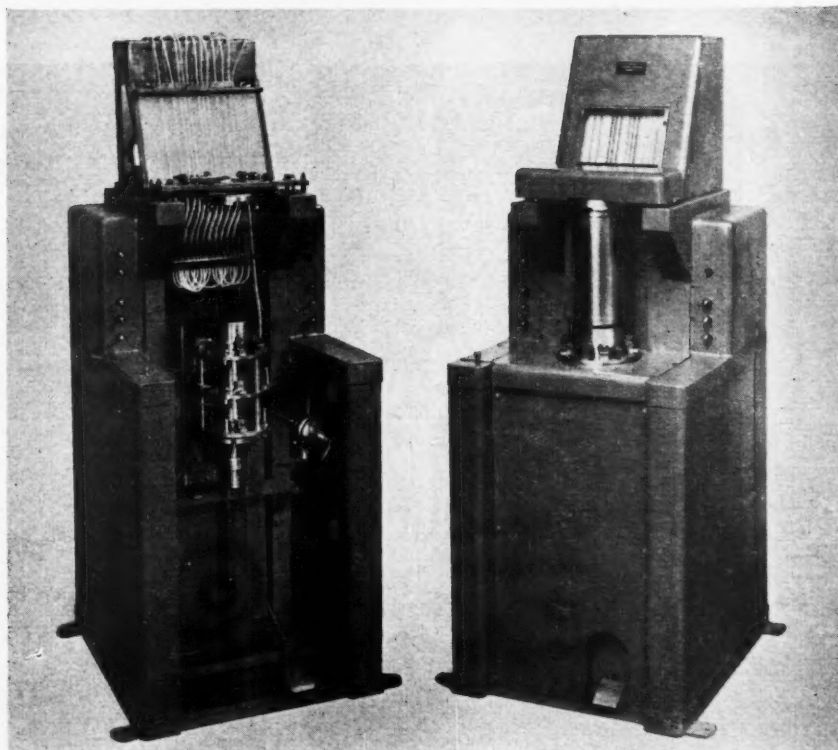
(above). Line inspection—multi-table cabinet, checking oil pump body in nine dimensions.
